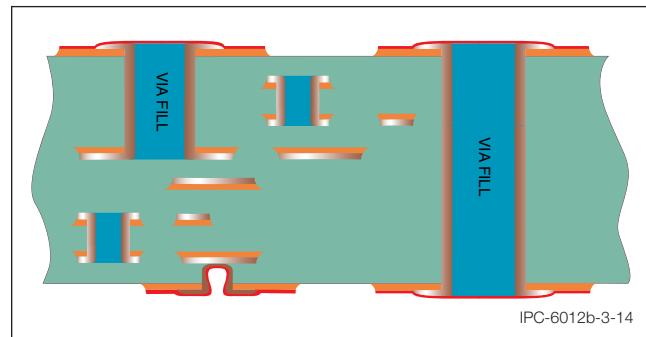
Wrap Copper in Type 4 PCB (Acceptable)
